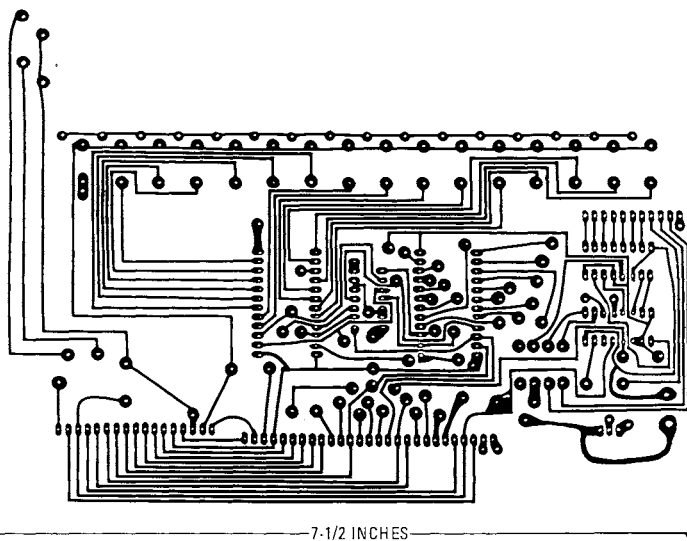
THE FOIL PATTERN for Board 2. The foil side of that double-sided board is shown here half-size.
